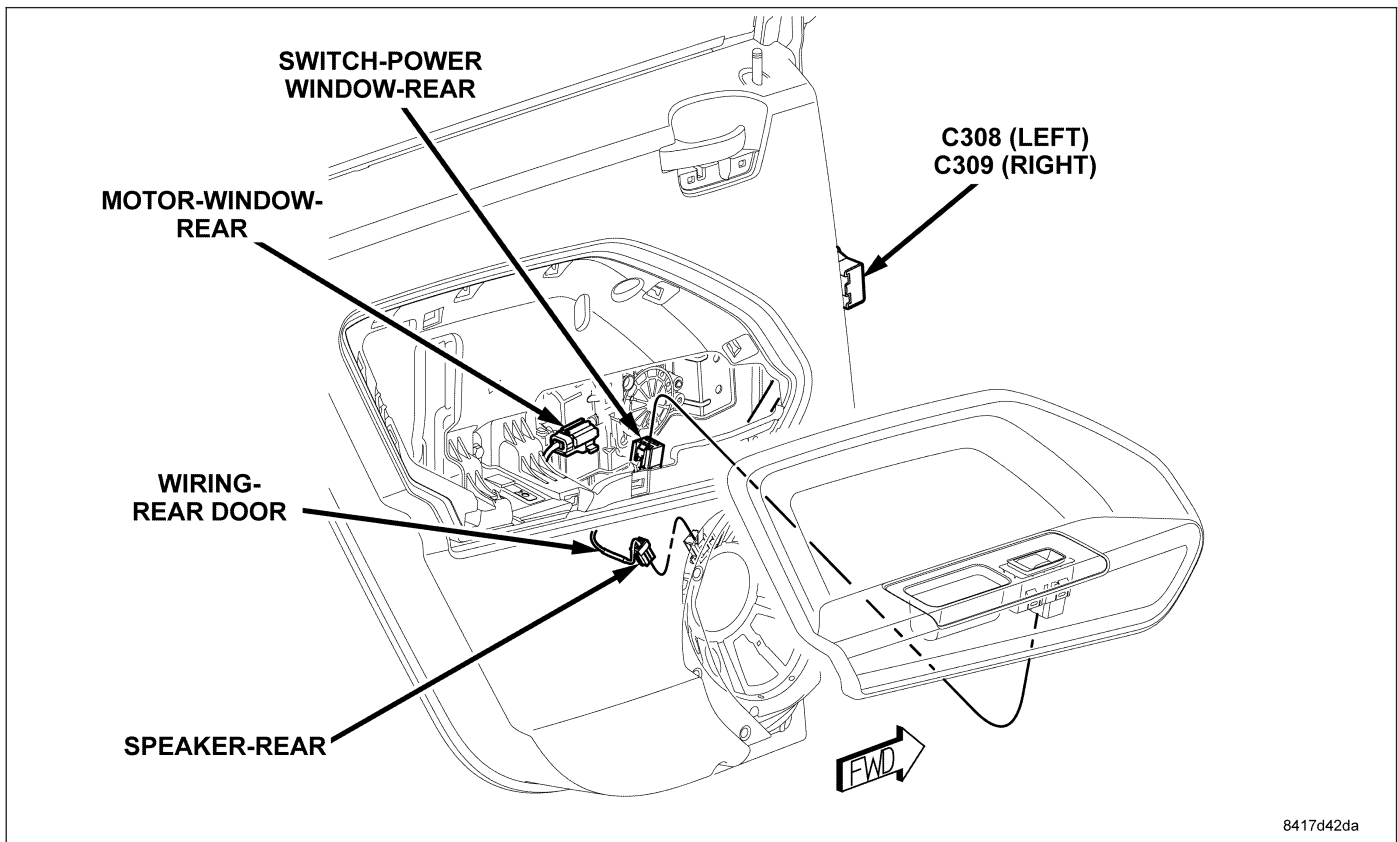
REAR DOOR - WITH TRIM (LEFT SHOWN, RIGHT SIMILAR)
